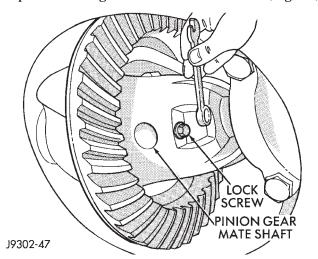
Pinion Gear Mate Shaft Lock Screw
